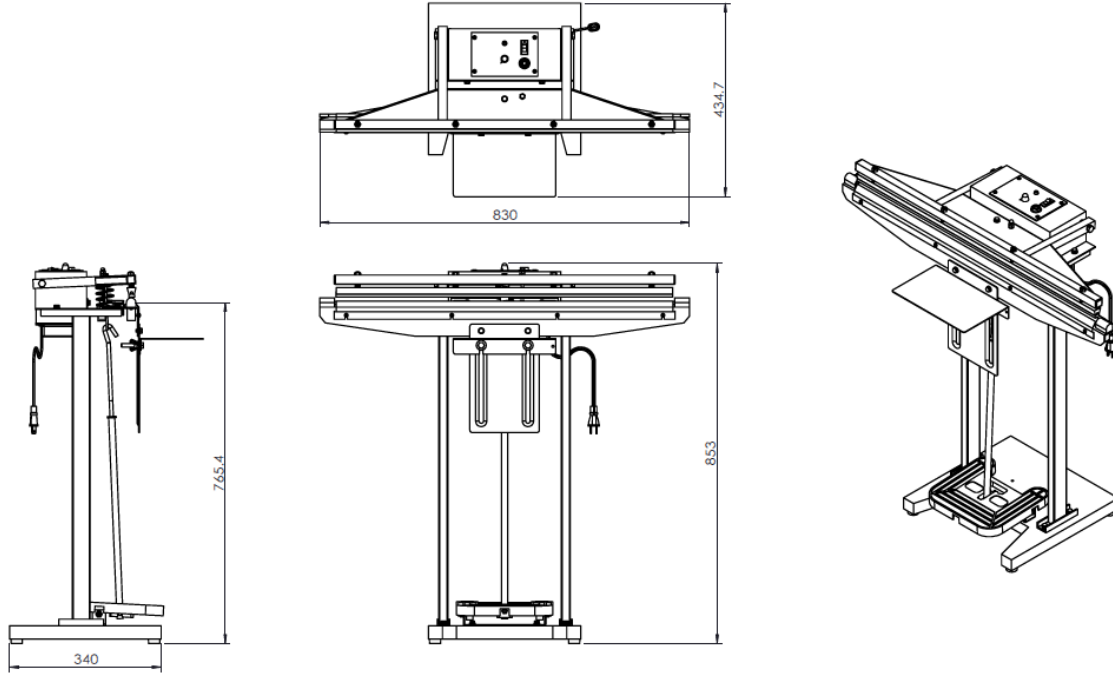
WN-750F Foot Sealer Dimensions - measurements are in mm
